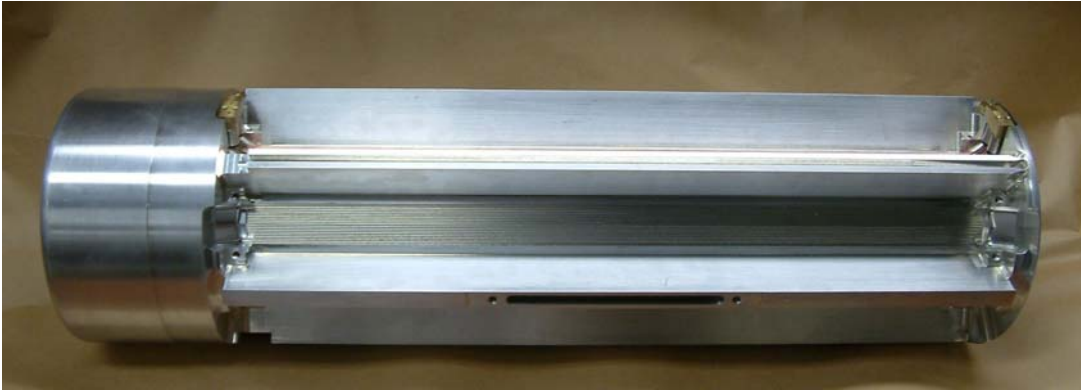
The newly machined plasma chamber. Grooves are machined into the bottom of the magnet channels. Three ports are machined radially between the channels.
